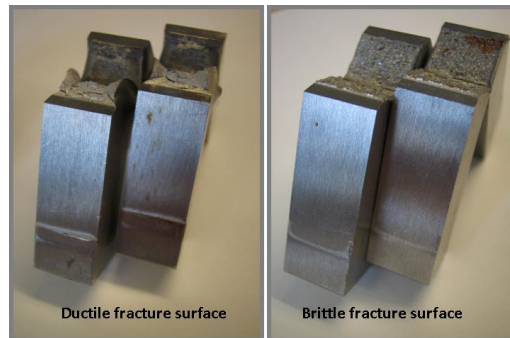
F70 Charpy notched test specimens: Fracture surface. Left: 5sec Right: 10sec
